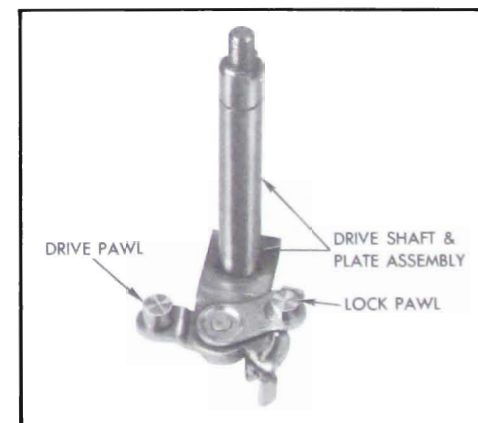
Assembly Lock Pawl Over Drive Pawl
